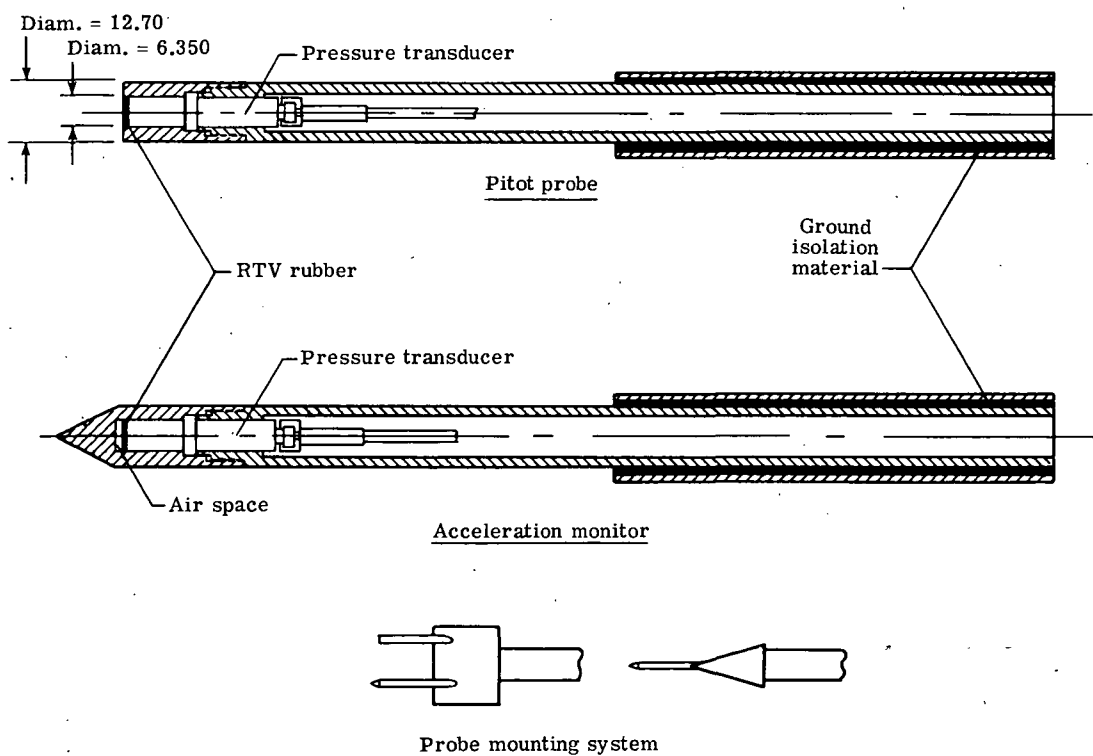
Method for mounting pressure transducers in pitot probe. Dimensions are in mm.
